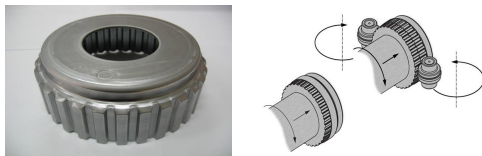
Schematic of Deep Drawing + Cold Reduction Process
